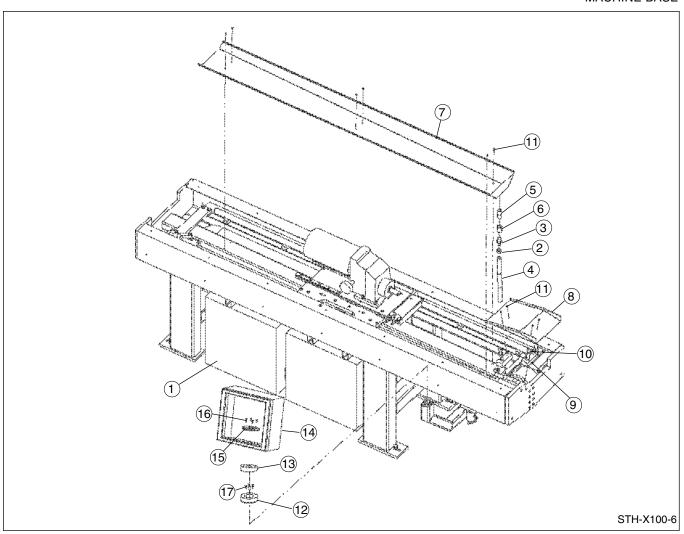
FIGURE A - TUBE HONE MACHINE BASE ASSEMBLY (6 of 8)
